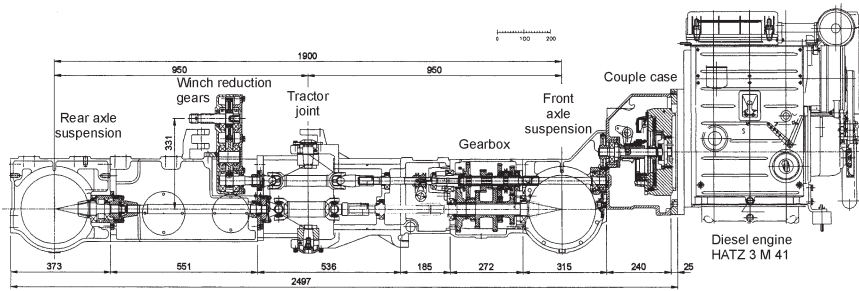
Longitudinal sectional view of the engine and installed boxes that create a tractor chassis
